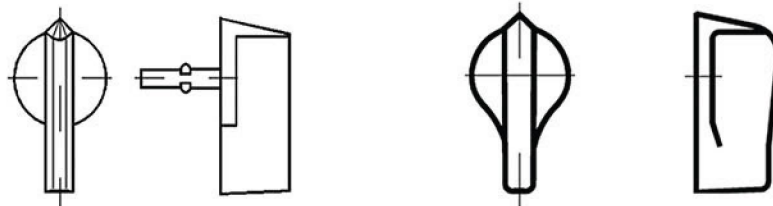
Removable universal knob for RS-PMt/p.o. switches
